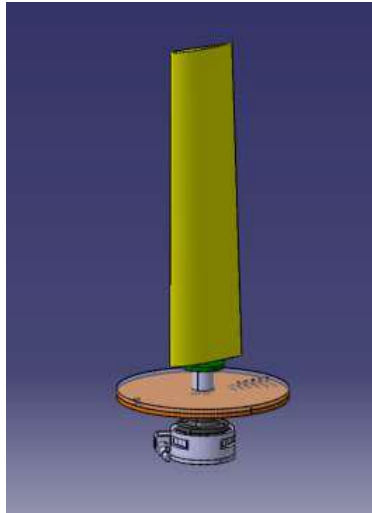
The drawing of the angle of attack mechanism, load cell and the wing [27]
